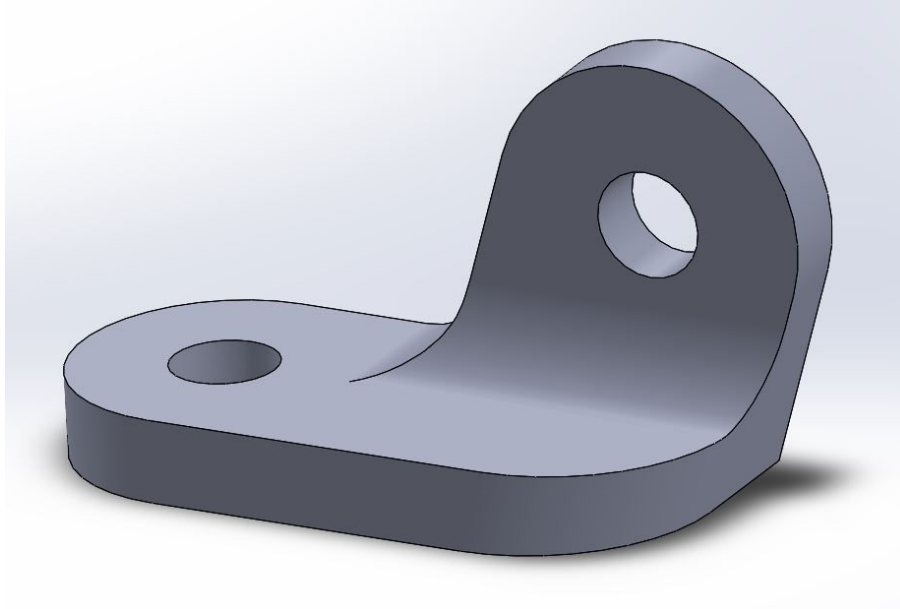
90° Angle Mounting Bracket - CAD Design
